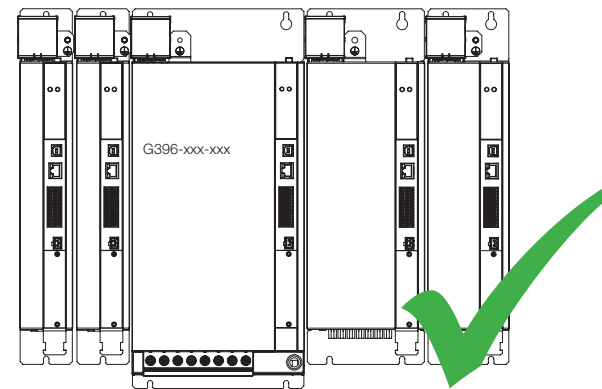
Example permissible arrangement: butt mounting DC-AC Servo Drives of the same size or reducing size on both sides of the Power Supply Unit
